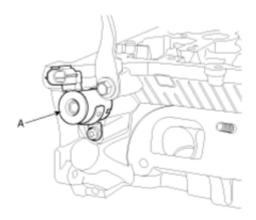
Identifying Exhaust Lower Bearing Courtesy of KIA MOTORS AMERICA, INC.
